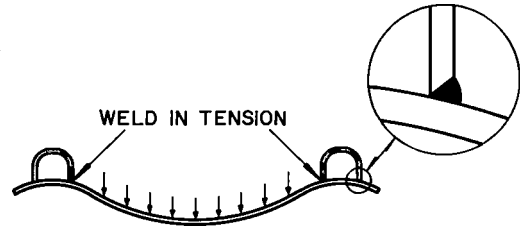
HORIZONTAL SECTION THROUGH CAR SHOWING FORCES AND DEFLECTIONS ON SIDE WALL
